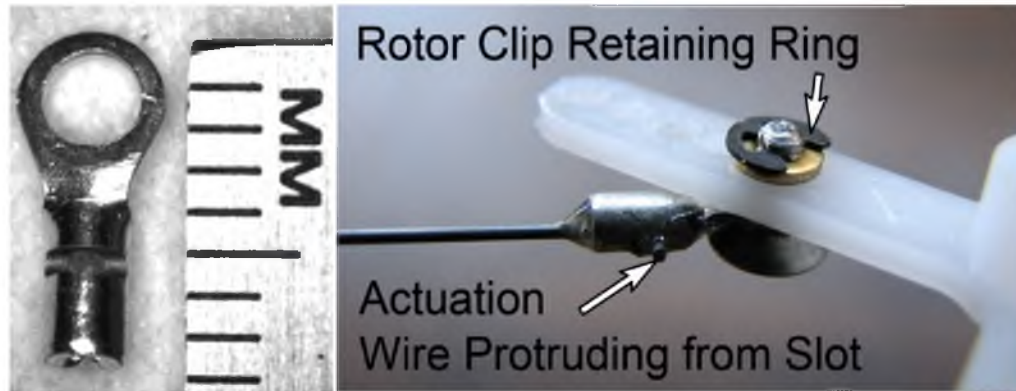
Eyelet with slot cut on wire EDM cutter (left). Pin-joint between actuation wire and servo wiper (right). Custom pin with tapered head held secured with rotor clip retaining ring and connection between actuation wire and ring terminal.
